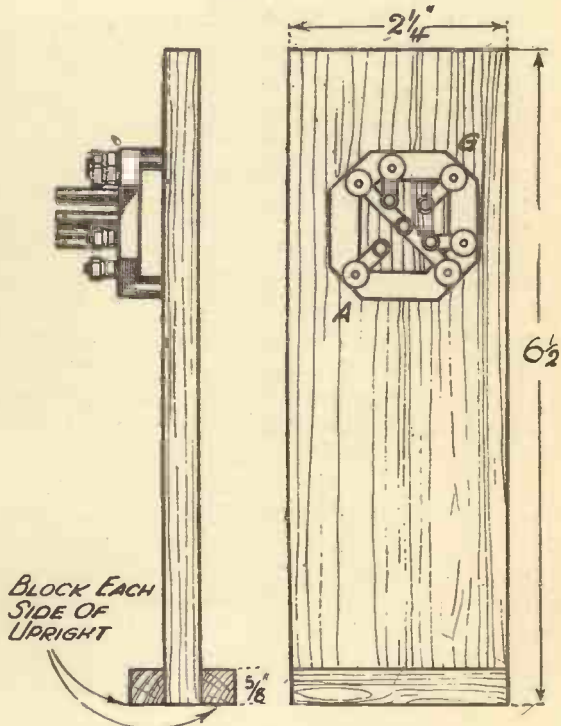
The valveholder for the cathode-ray tube is mounted on a vertical piece of wood as shown
